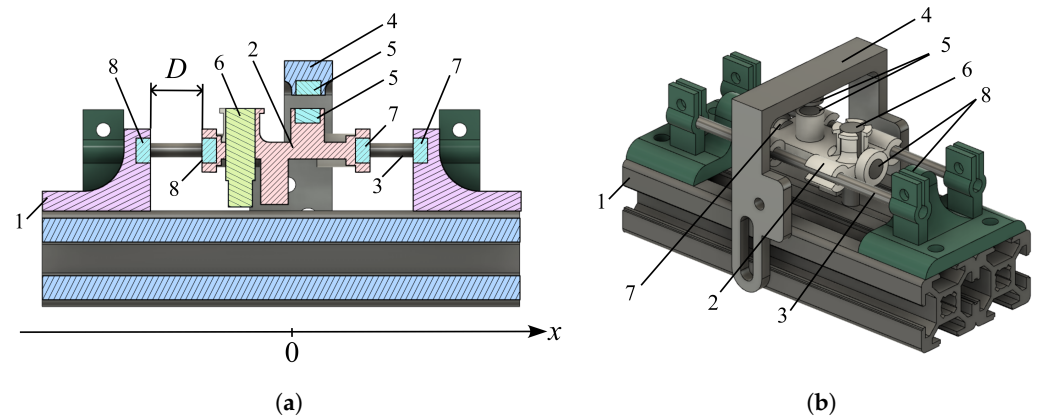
Side view (a) and 3D view (b) of the mechanical system design. Here: (1) frame; (2) carriage; (3) linear guide; (4) top frame; (5) top pair of repulsive magnets; (6) excitation vibration motor; (7) right pair of repulsive magnets; (8) left pair of repulsive magnets, fully symmetric to the right pair. D is the width of the magnetic spring.
